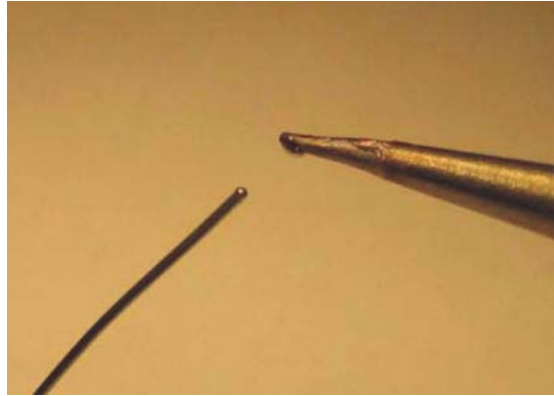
Small amount of solder added to ZIF Tip of soldering iron
